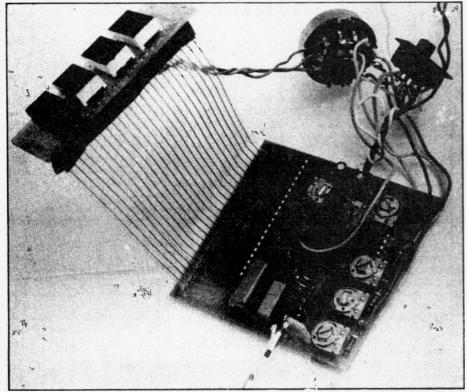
An 'exploded' view of the Millivoltmeter, before final assembly. 34—JANUARY—1983—ETI
